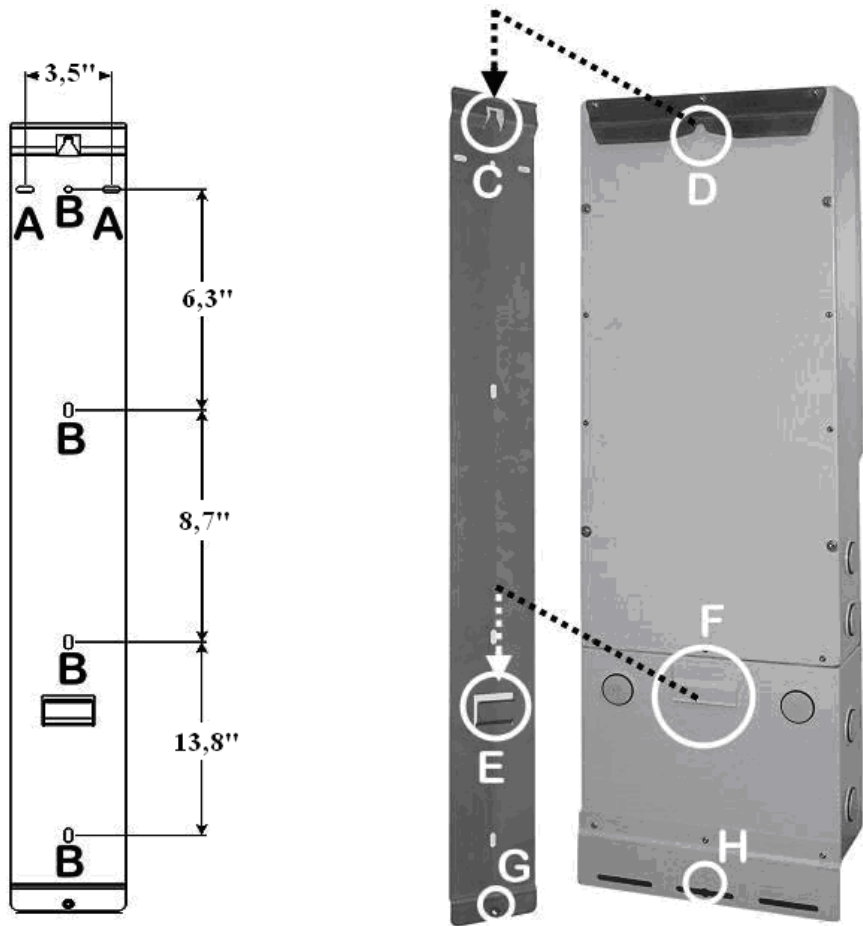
Wall Bracket and Wall Mounting (only -S-US models)
